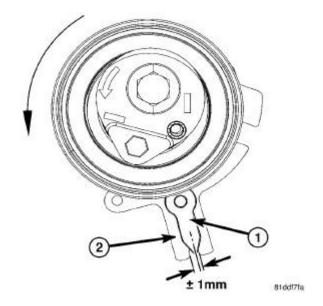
Tensioner Indicator & Tensioner Gage Slot Courtesy of CHRYSLER LLC
